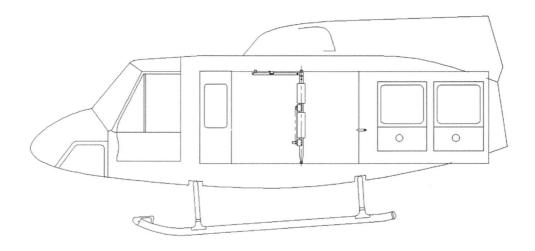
RAPPEL MOUNT PROVISION INSTALLATION
